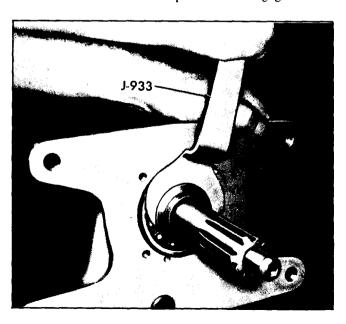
D-16 Removing Clutch Gear Bearing Retainer Nut
